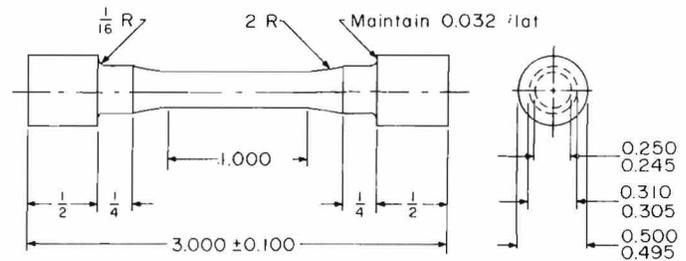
Fatigue test specimen. (Measurements in inches.)
